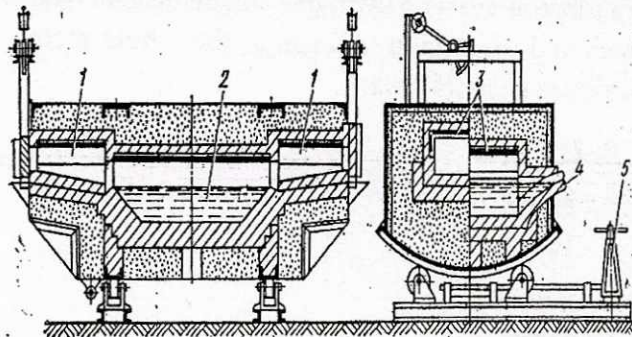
Schematic diagram of resistance furnace for melting of Al-alloys; (1) Charge chamber, (2) metal receiver, (3) heaters, (4) tap hole, (5) drive of the furnace tilting mechanism.
